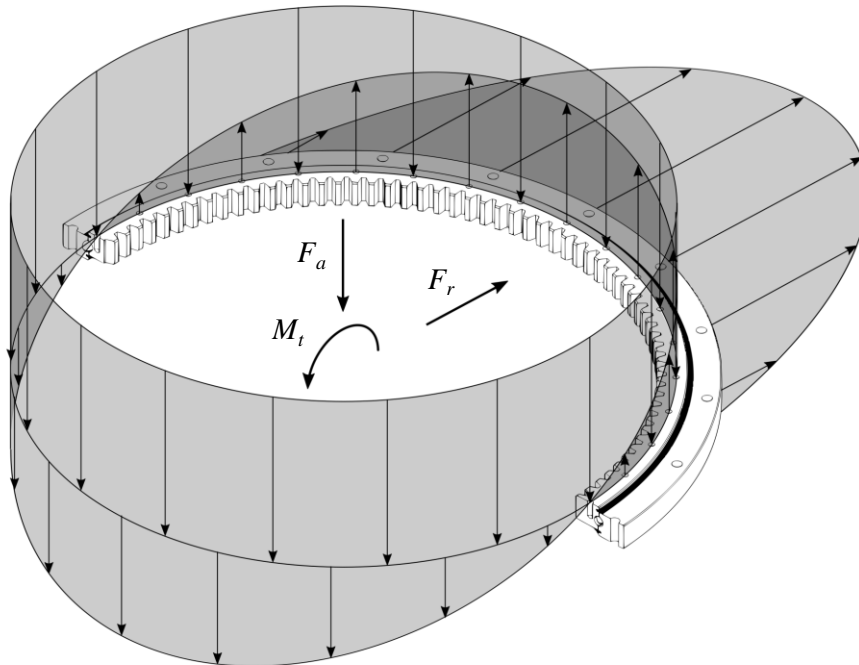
Combined external loads applied on a slewing bearing [18].
